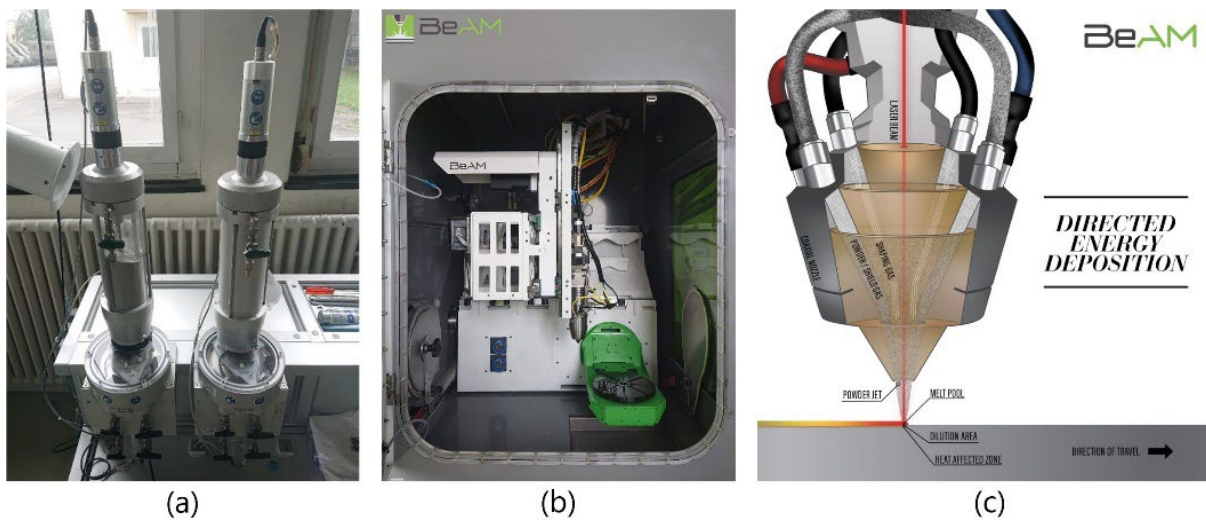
Laser Metal Deposition (LMD) machine: (a) Dual-container powder feeder; (b) interior of the printing chamber; (c) schematic of the coaxial nozzle.
